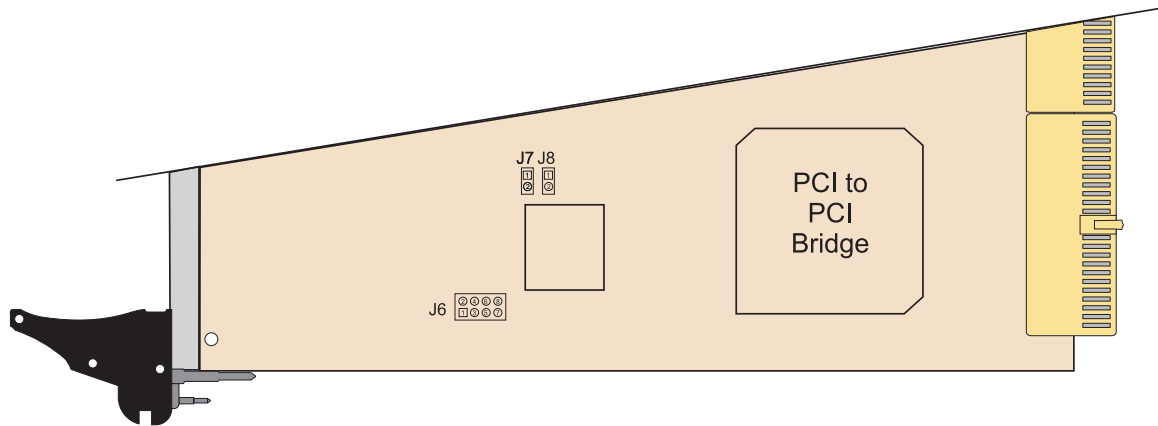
Secondary PCI Clock Disable Jumper Location
